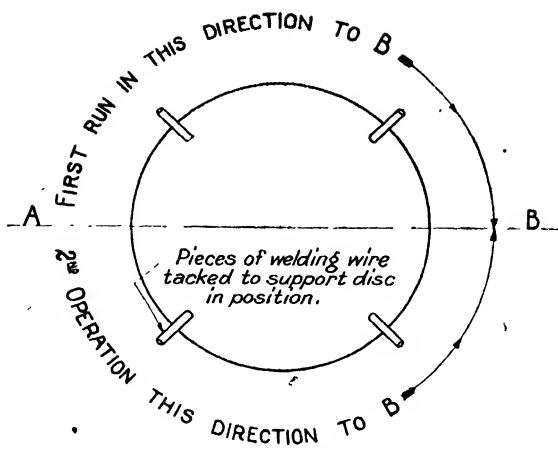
THE CORRECT METHOD OF WELDING BLANK IN A TANK
